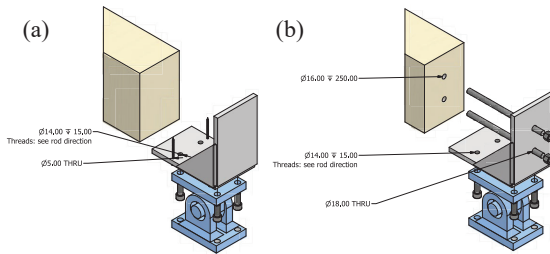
Shear pin and hinge system, which connects the impact hammer to the pendulum frame. The figure is reproduced from Cao et al. [27].
